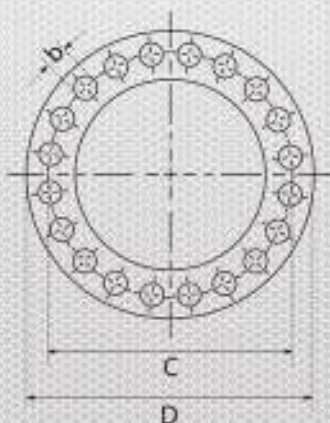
PLATE FLANGE FOR WELDING Unit : mm.
